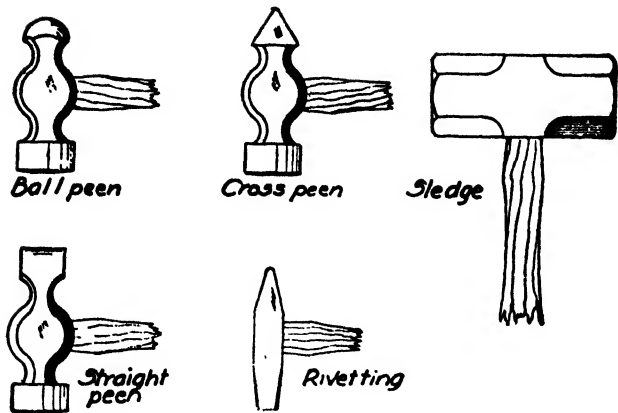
Blacksmiths' and Machinists' Hammers.
